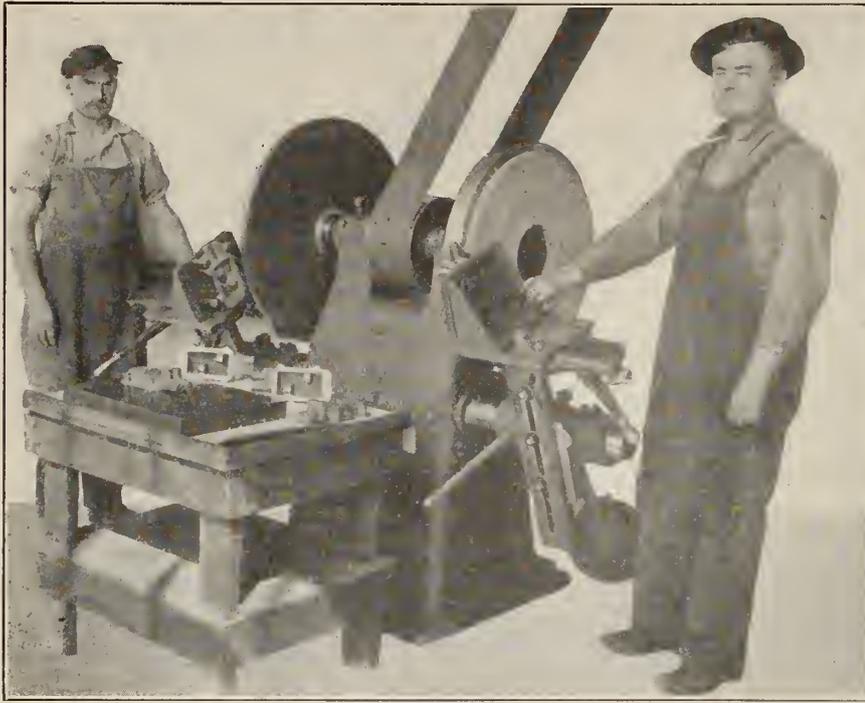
GRINDING SMALL MALLEABLE IRON CASTINGS.
